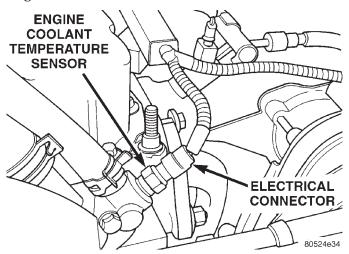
Engine Coolant Temp. Sensor—4.0L Shown
